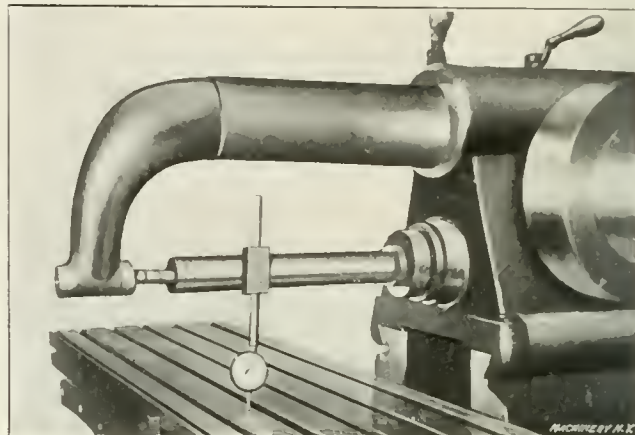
Testing Longitudinal Alignment of Milling Machine Table
